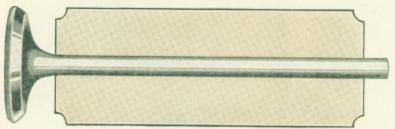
Refacing Valves by turning is Six Times Faster than Grinding
